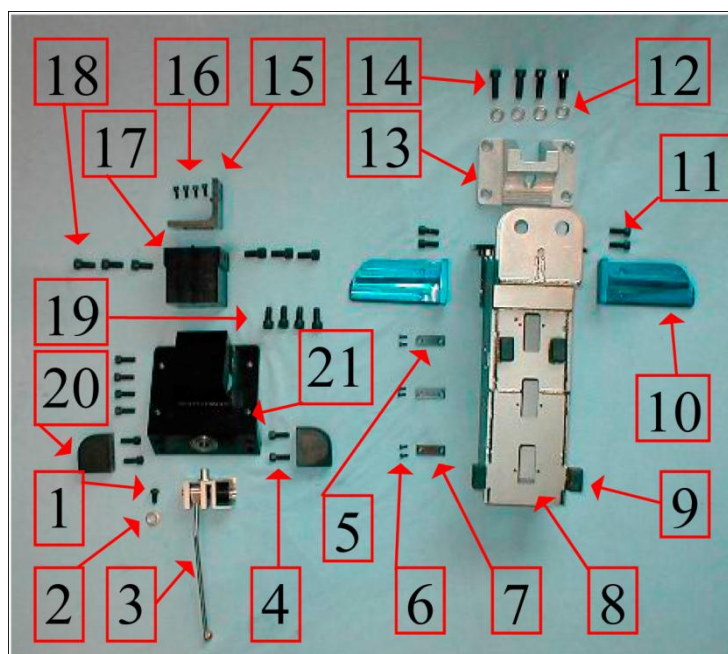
THORACIC SPINE ASSEMBLY, EXPLODED
